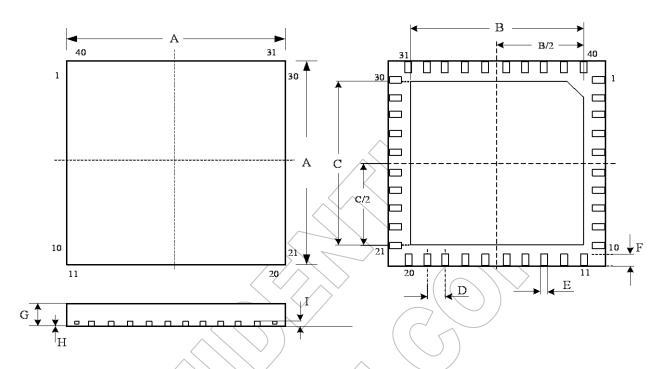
40 Pin QFN Package (5 x 5 mm)
